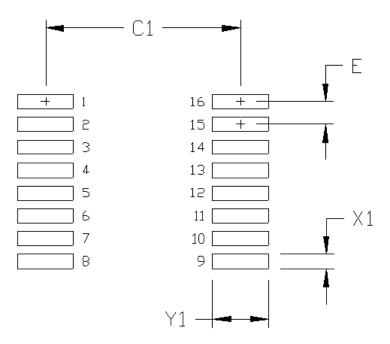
PCB Land Pattern: 16-Pin QSOP
